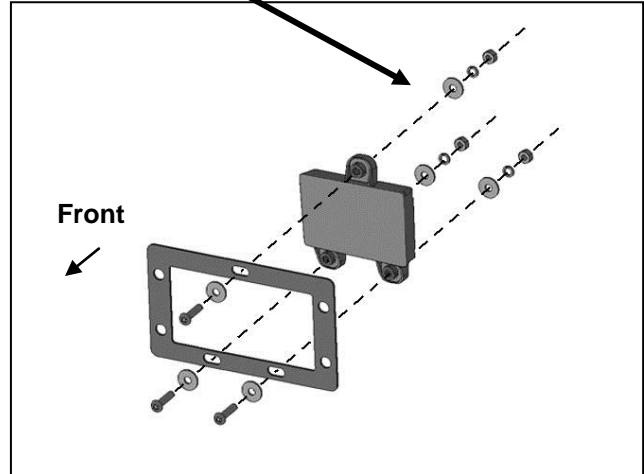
F-150 Models. Remove plastic bumper pad to locate, unplug and remove sensor
